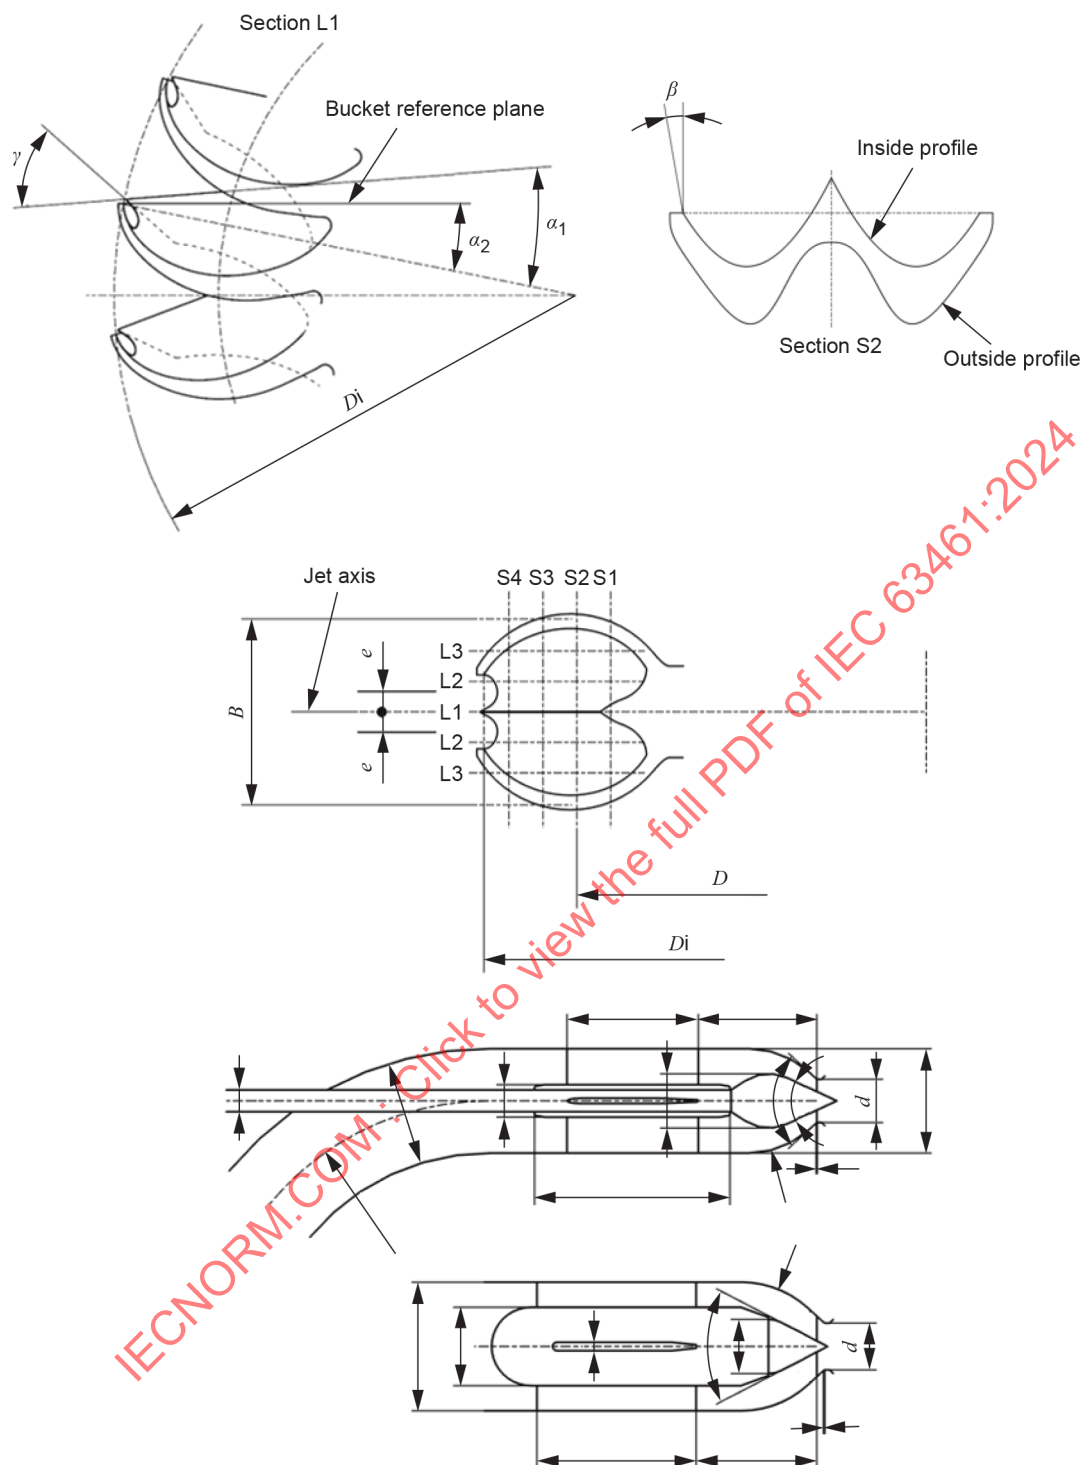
Pelton turbine: example of dimensions to be checked on the buckets and nozzles
